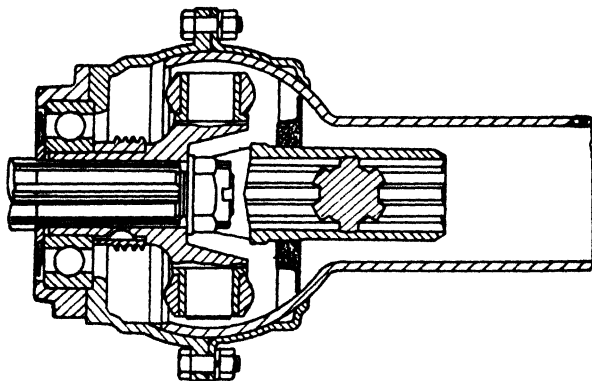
BALL-AND-SOCKET SUPPORT FOR FORWARD END OF TORQUE TUBE.
